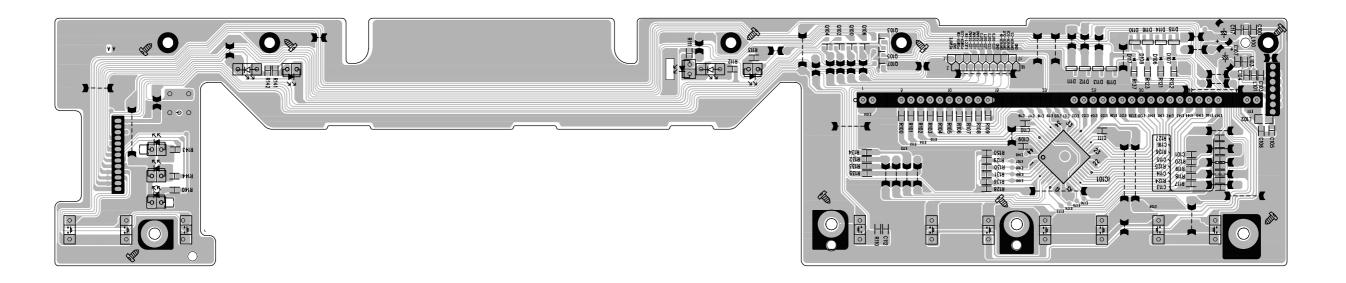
EU03A Front (R) PC Broad (Bottom side)
